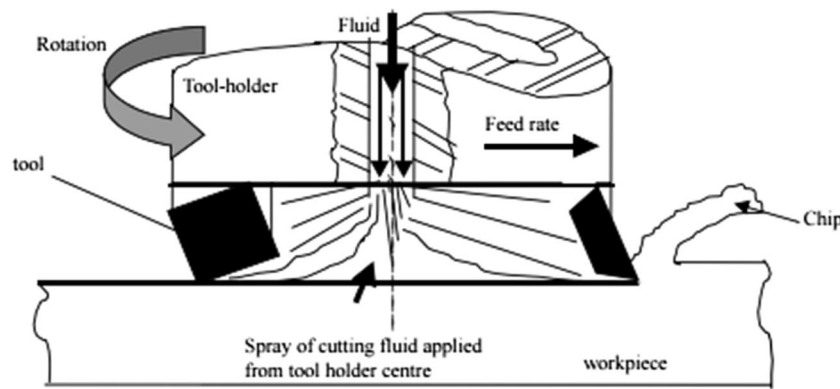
Schematic view of face milling with through-the-tool MQL system [142]
